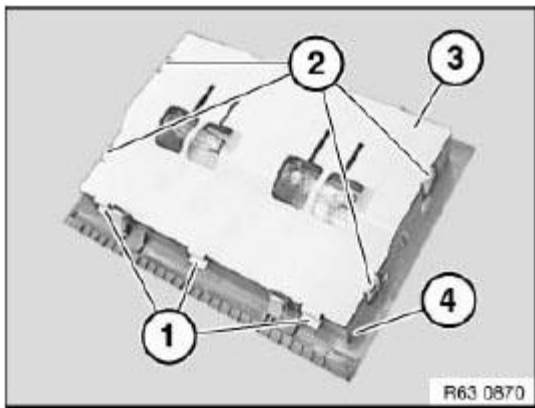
Identifying Holders, Housing Section And Cover Retainer
